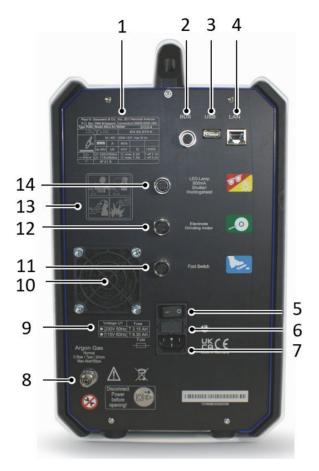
MOLD & DIE WELDER U6 / rear view
